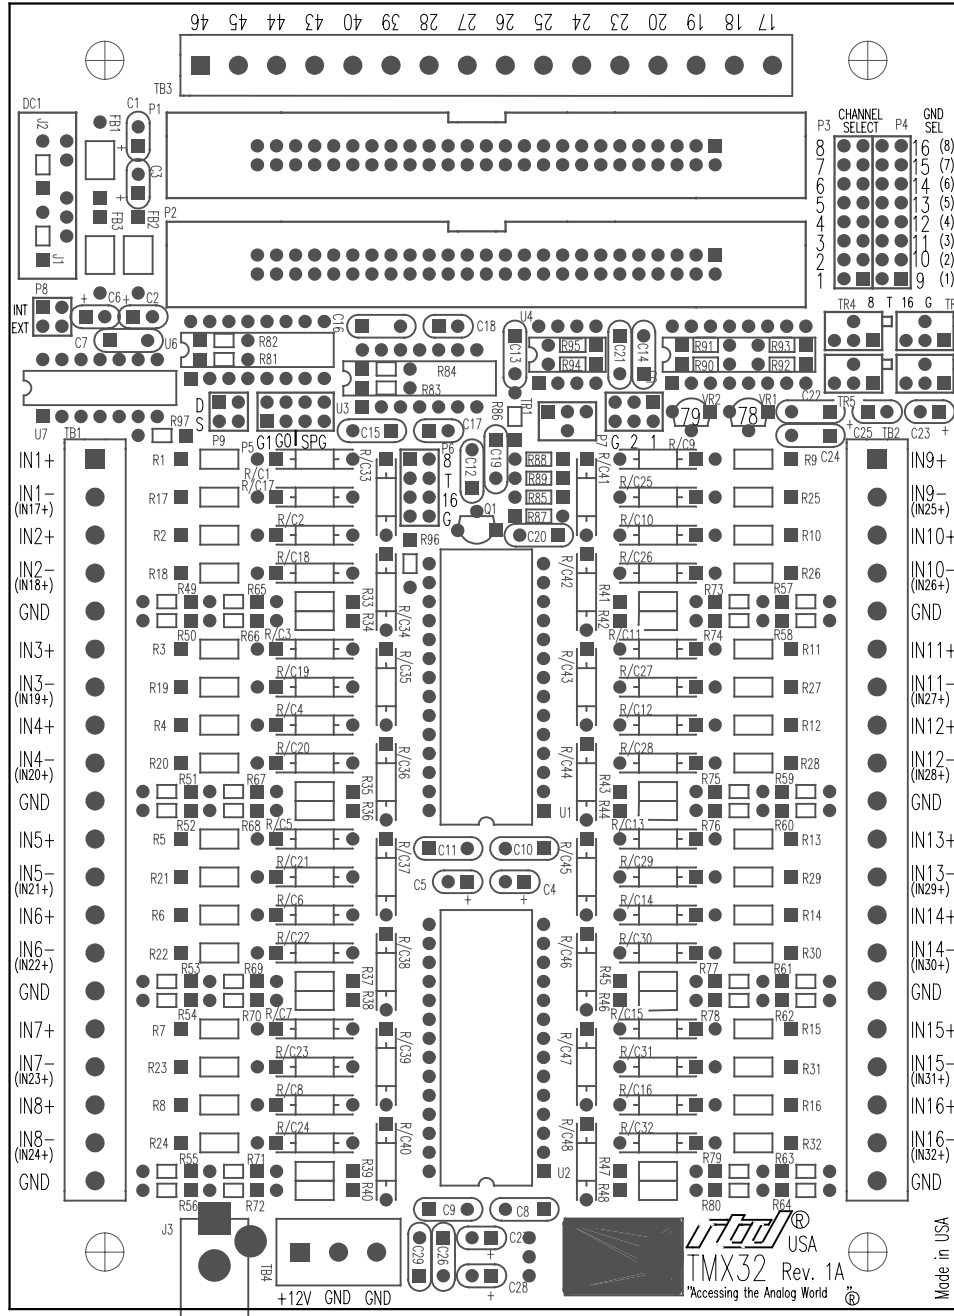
Board Layout Showing Factory-Configured Settings
